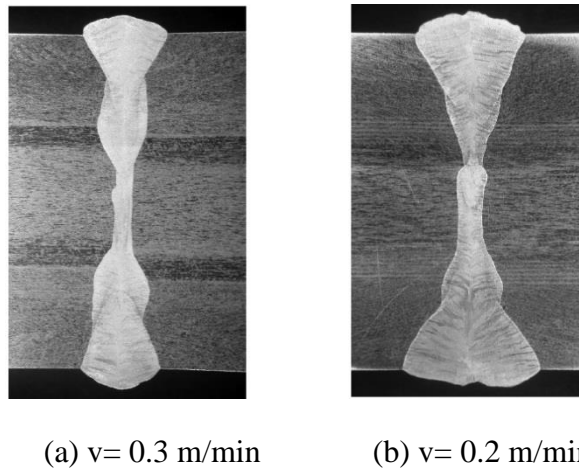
Gas jet assisted laser welding of 40 mm thick plates
